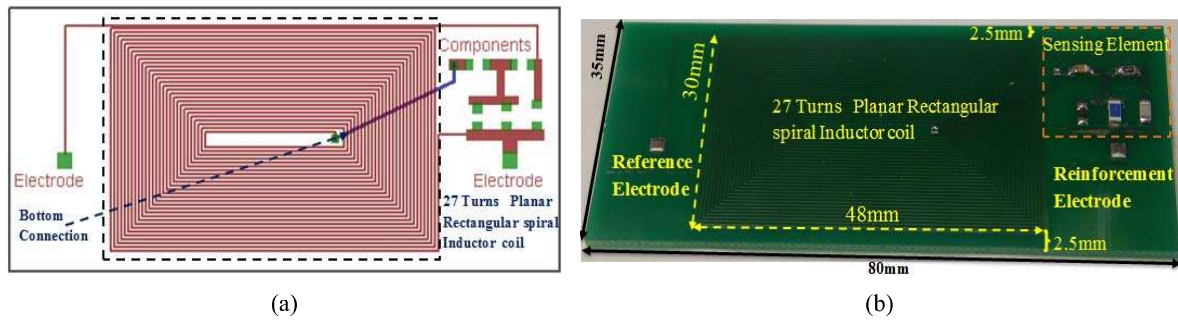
(a) Drawing of the sensor. (b) Sensing circuit. [53].
